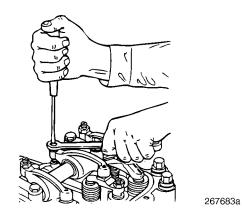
Loosening Exhaust Rocker Arm Locknut and Backing Out Adjusting Screw
